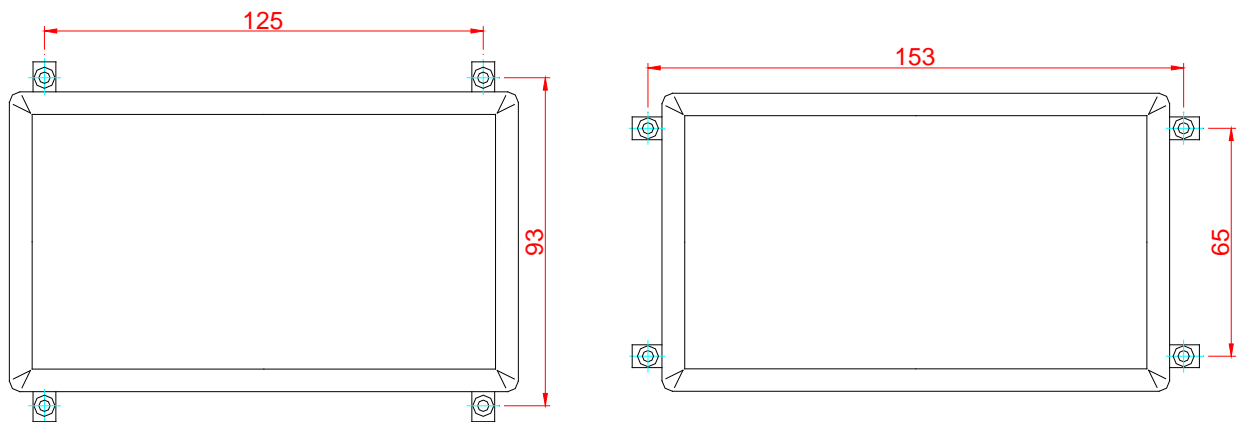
Mounting drill dimensioning (all dimensions in mm)
